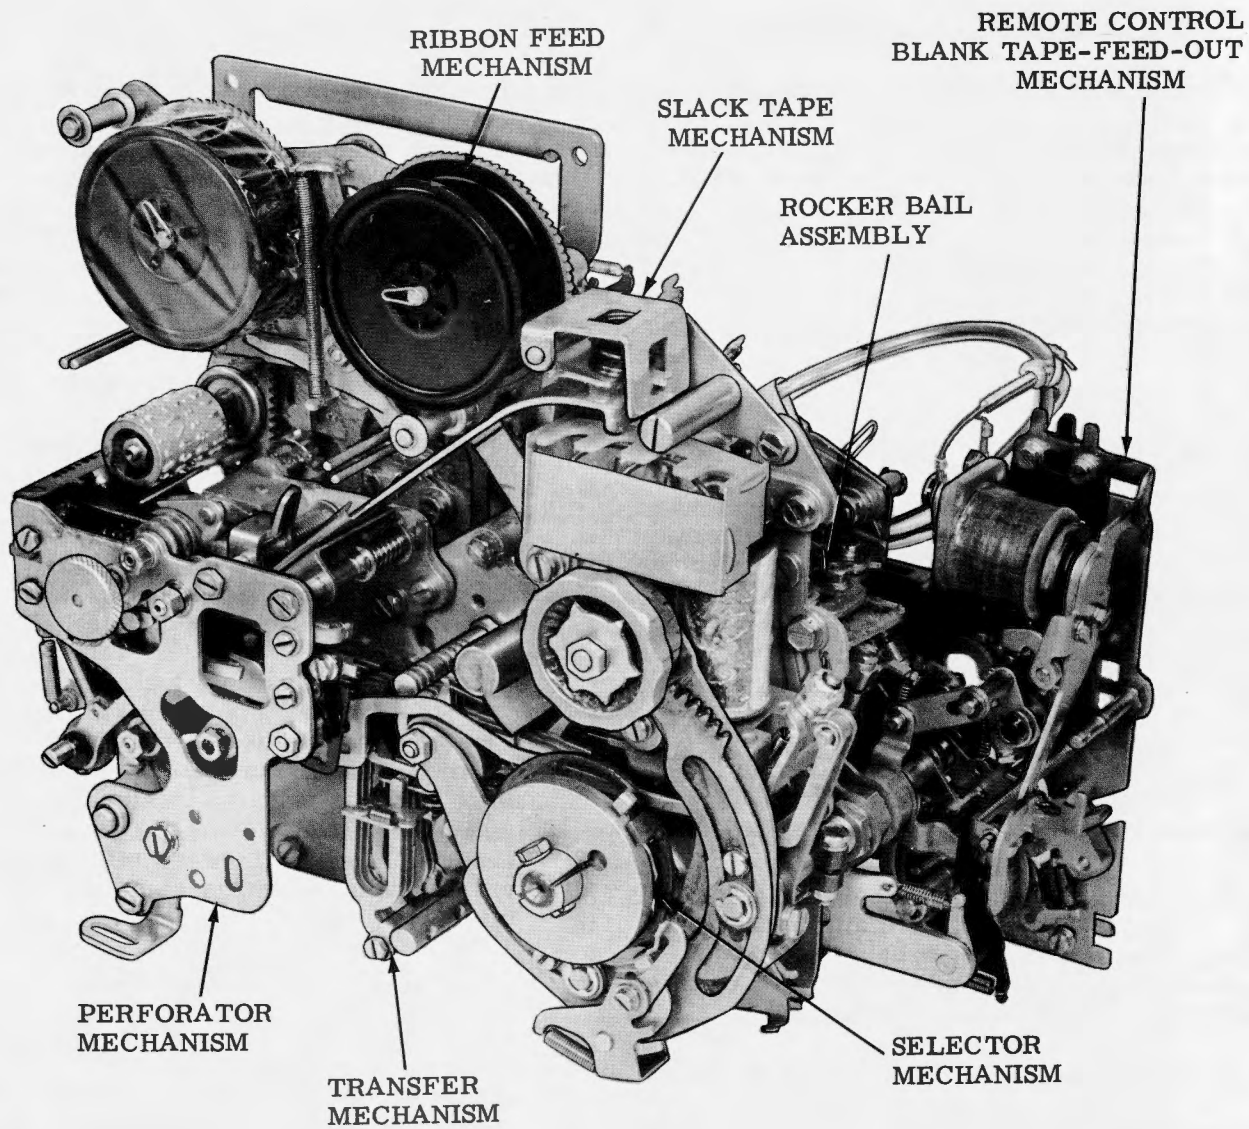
28 Typing Reperforator Unit with Remote Control Blank Tape Feed-Out Mechanism (Fully Perforated Tape)
